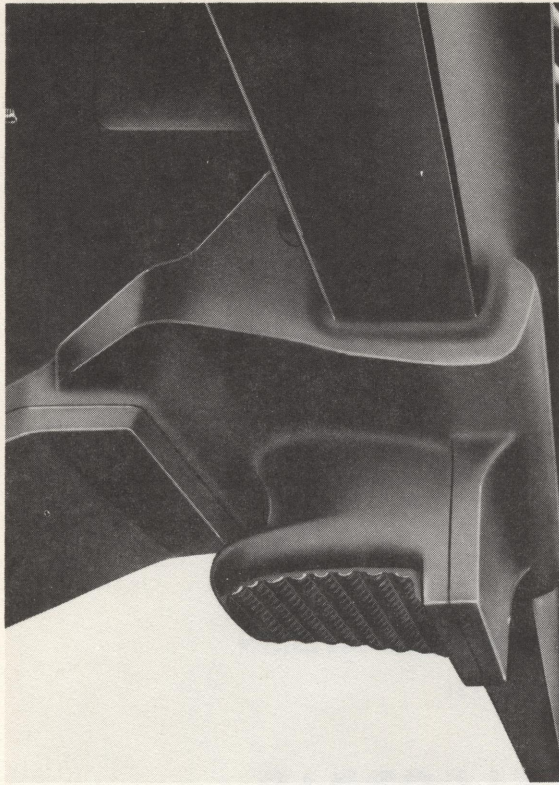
LIFTING HOOK AND LOADING PAD.
